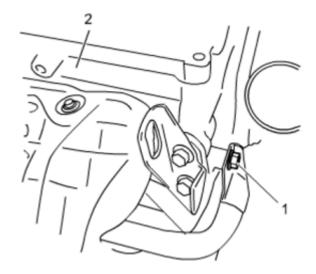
Identifying Heater Outlet Pipe Bolt And Cylinder Head Courtesy of SUZUKI OF AMERICA CORP.
